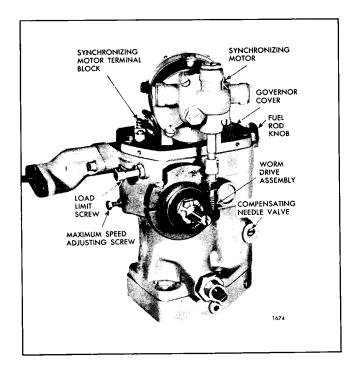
Typical Synchronizing Motor Mounting and Drive Assembly
